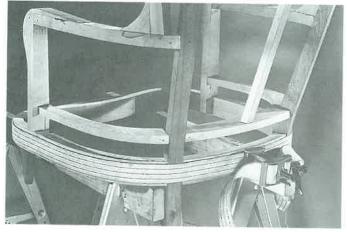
A web clamp holds this chair frame until the adhesive sets. (*Adjustable Clamp Co.*)
